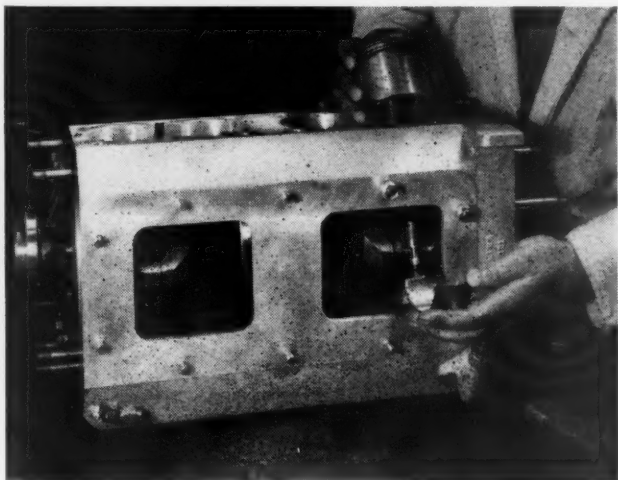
Looking inside the integral block and head. The valve ports can be seen up in the combustion chamber, with the plug hole in the center.
